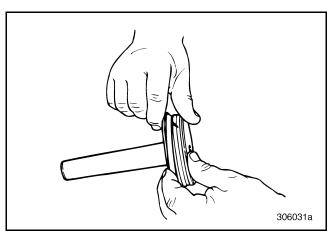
Removing Teflon® Seal and O-Ring from Piston Grooves
